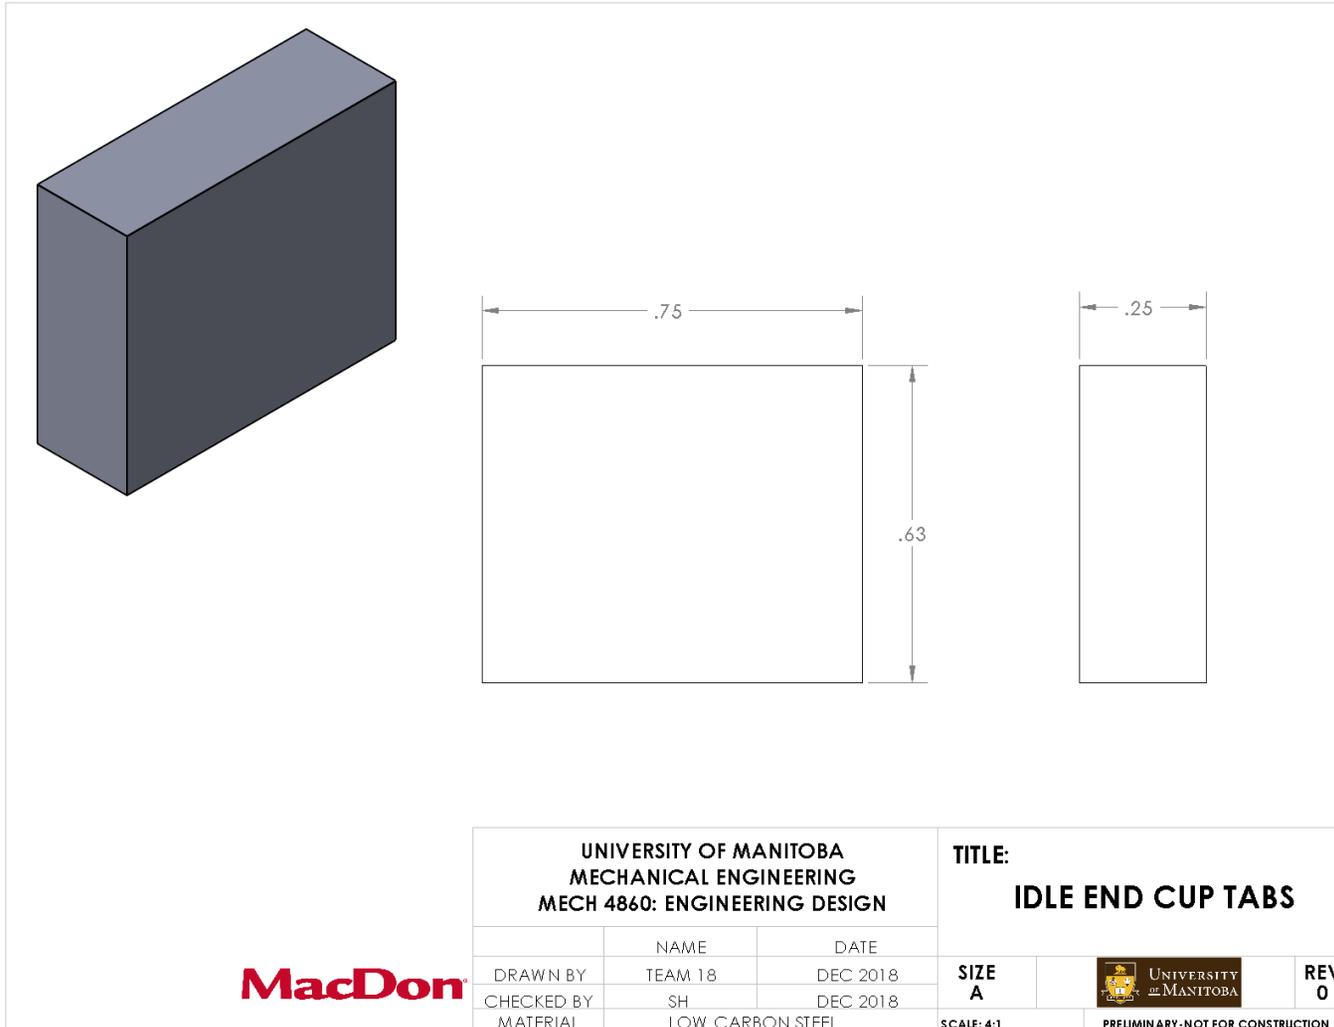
Preliminary Drawing for the Idle End Cup Tabs
